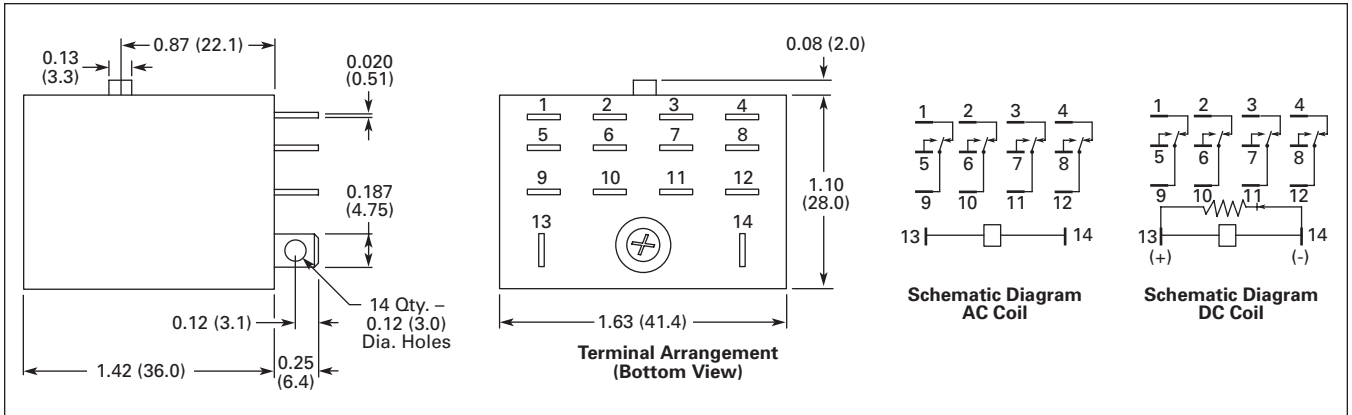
D7PR43 — Approximate Dimensions in Inches (mm)
